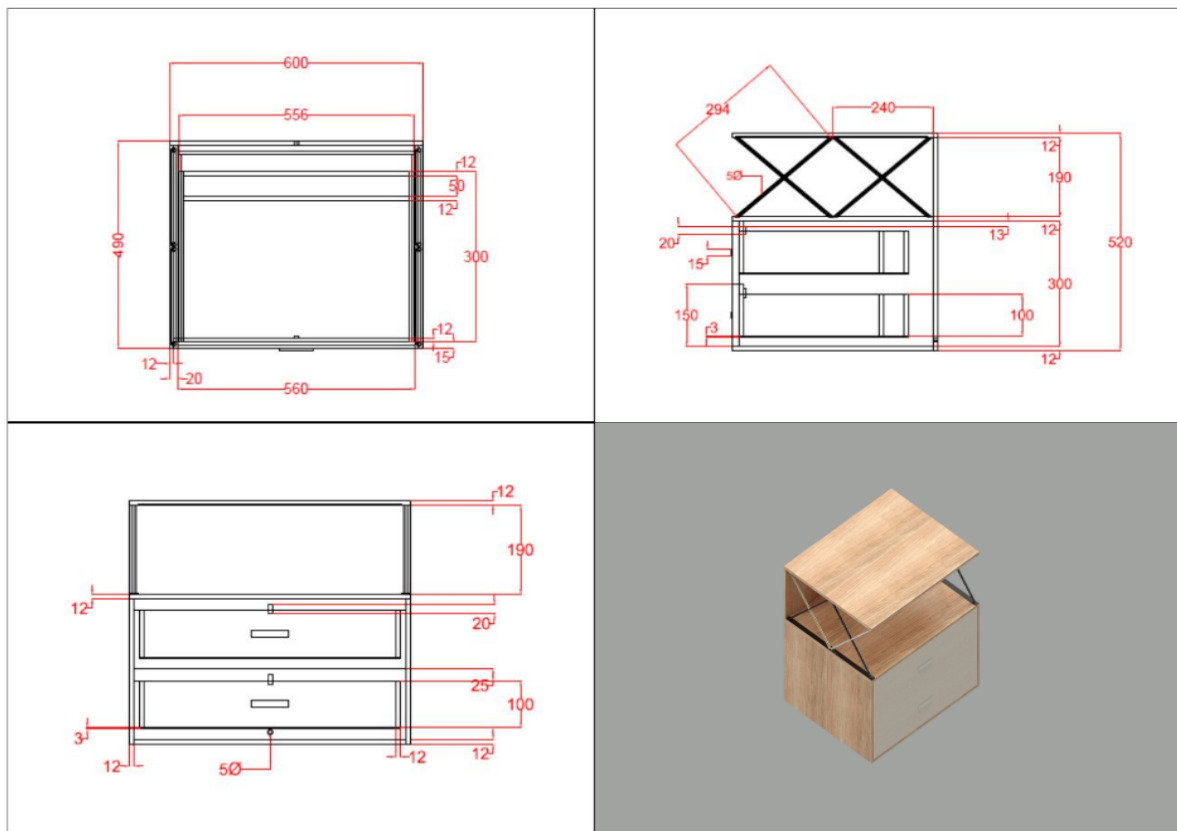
Technical drawing of bedside table with hidden compartment inspired by geometric
